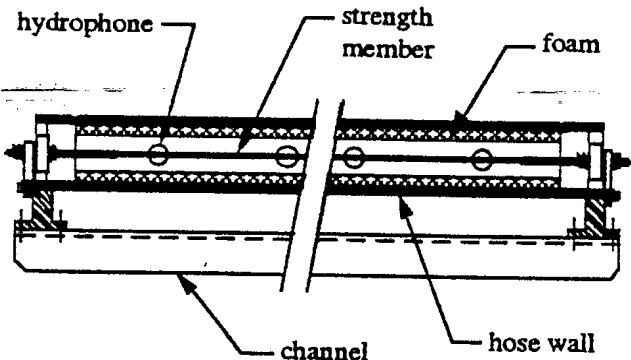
Cross-section sensor layout for linear array. Only four of the six sensors are shown.
